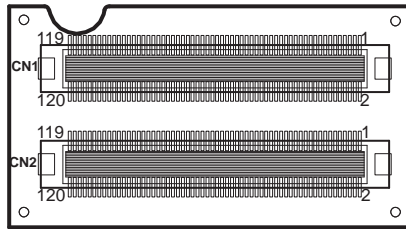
MR-5102RA-3 Daughter Board (Top View)
